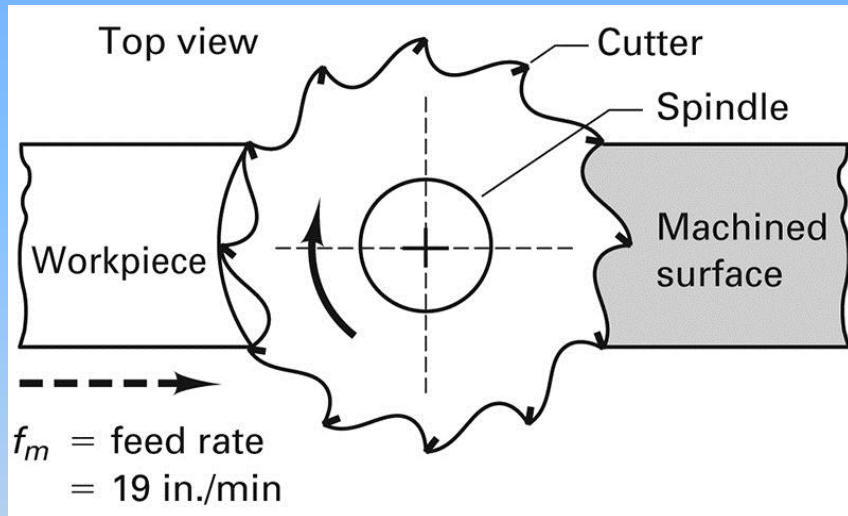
Face milling viewed from above with vertical spindle-machine.
